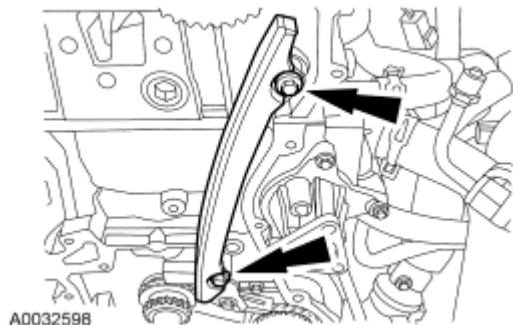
Identifying Bolts And LH Timing Chain Guide
